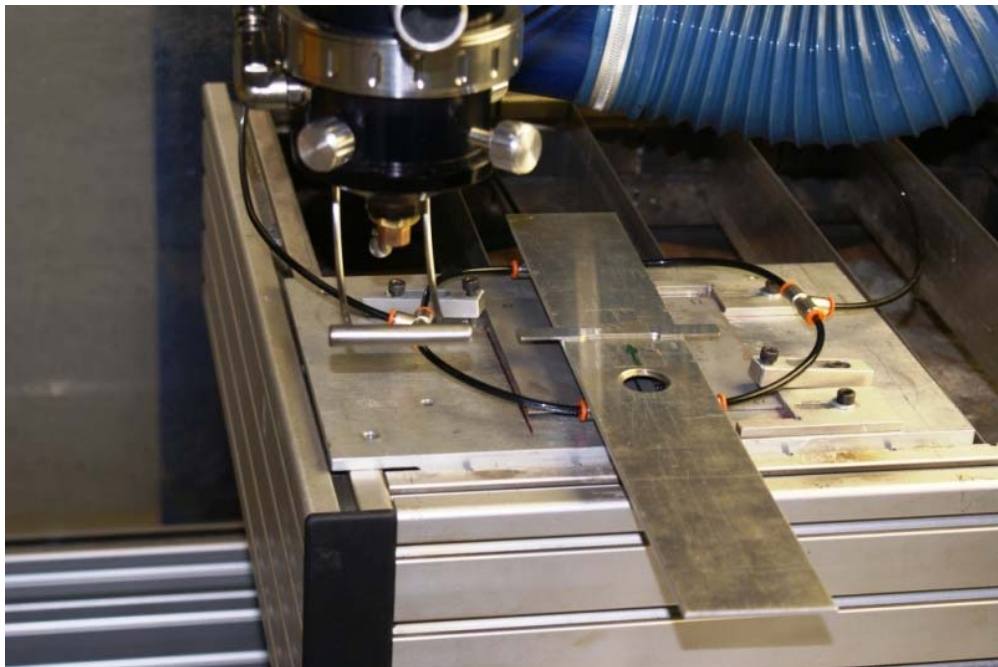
The fixture used for clamping the plates during welding operation.
